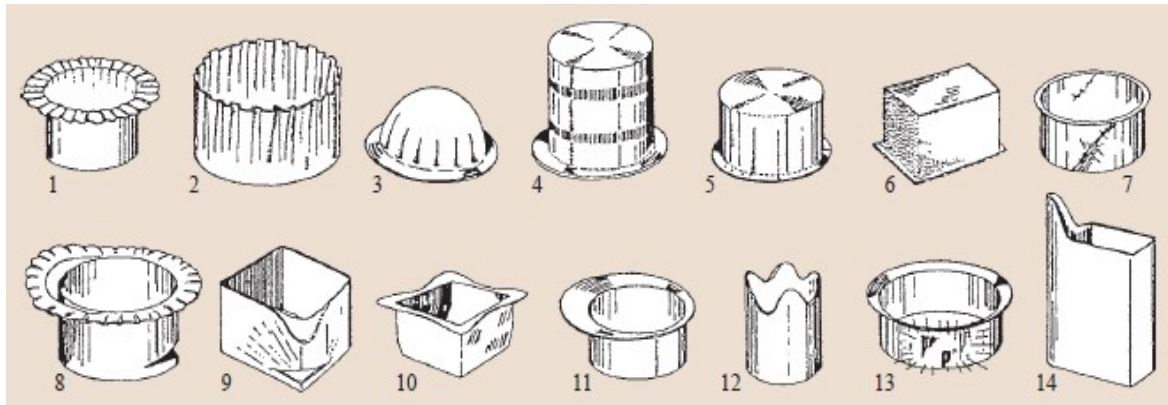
Various failure modes in deep-drawing: 1-flange wrinkling; 2-wall wrinkling; 3- part wrinkling; 4-ring prints; 5- traces; 6-orange skin; 7-Lüder's lines; 8-bottom fracture; 9- corner fracture; 10,12-folding; 13,14-corner folding. [29]
